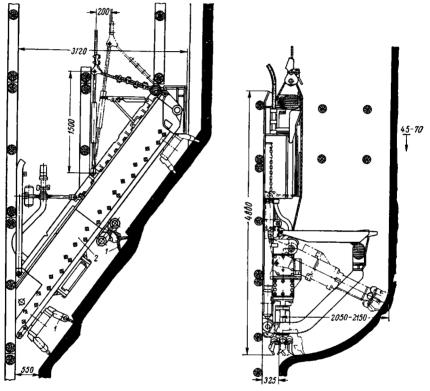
KKΠ-2 (KKP-2) coal mining machine
